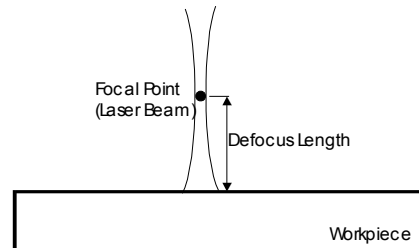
Defocus length is the distance from the focal point of the laser beam and the surface of the workpiece/weld joint. If the focal point is under the surface of the weld joint, the defocus length is negative.
